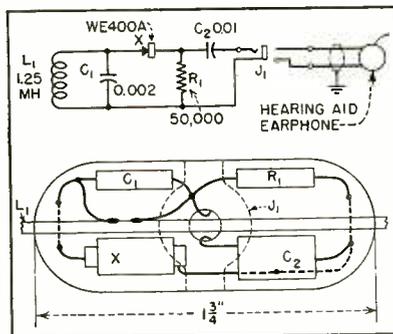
Circuit diagram and drawing showing placement of receiver parts
